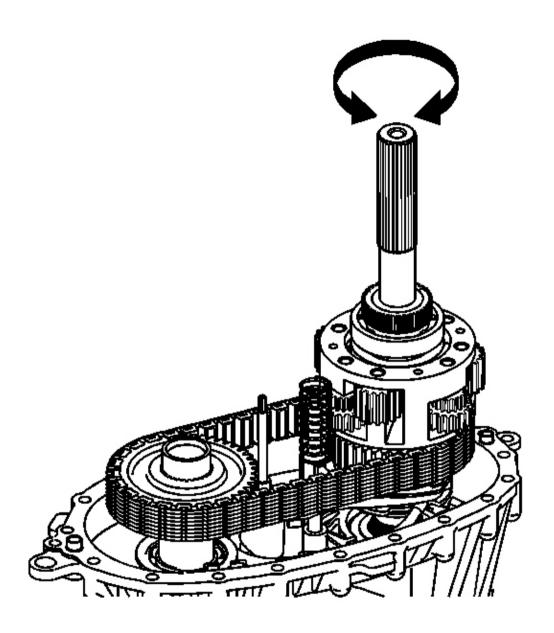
Checking Planetary Differential Pinion Gear Rotation With Rear Output Shaft Courtesy of GENERAL MOTORS CORP.
